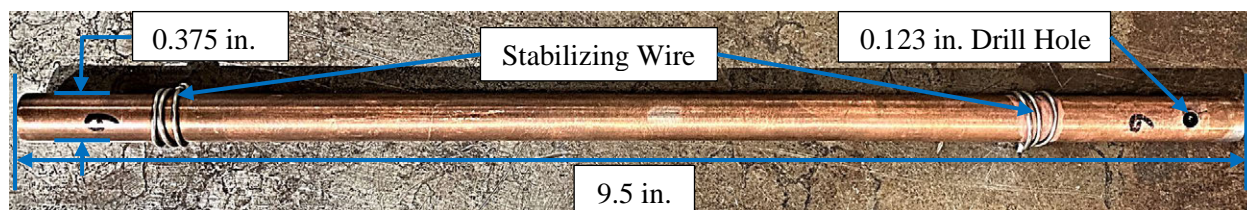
View of a 9.5 in. copper tube ampoule with 0.123 in. diameter drill hole.
